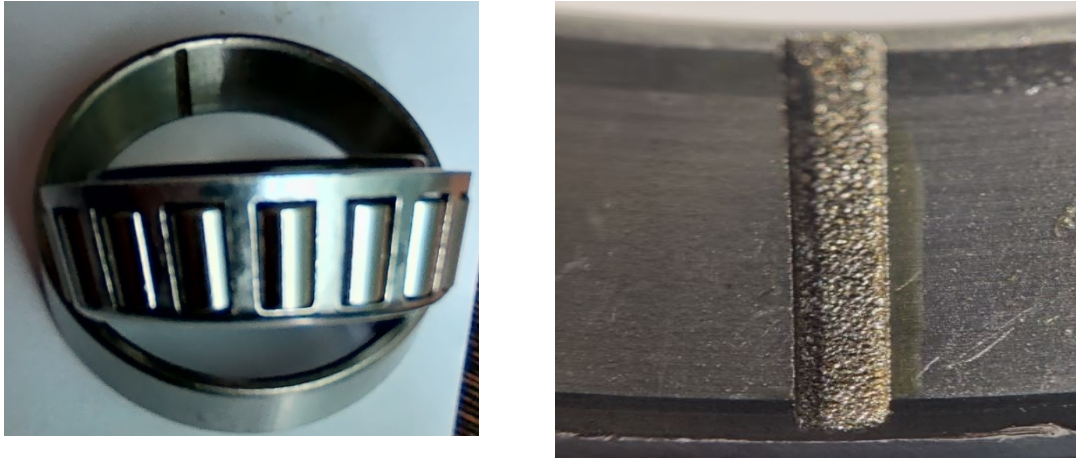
7 Taper roller Bearing with (a) outer race defect (b) enlarge view of outer race defect
